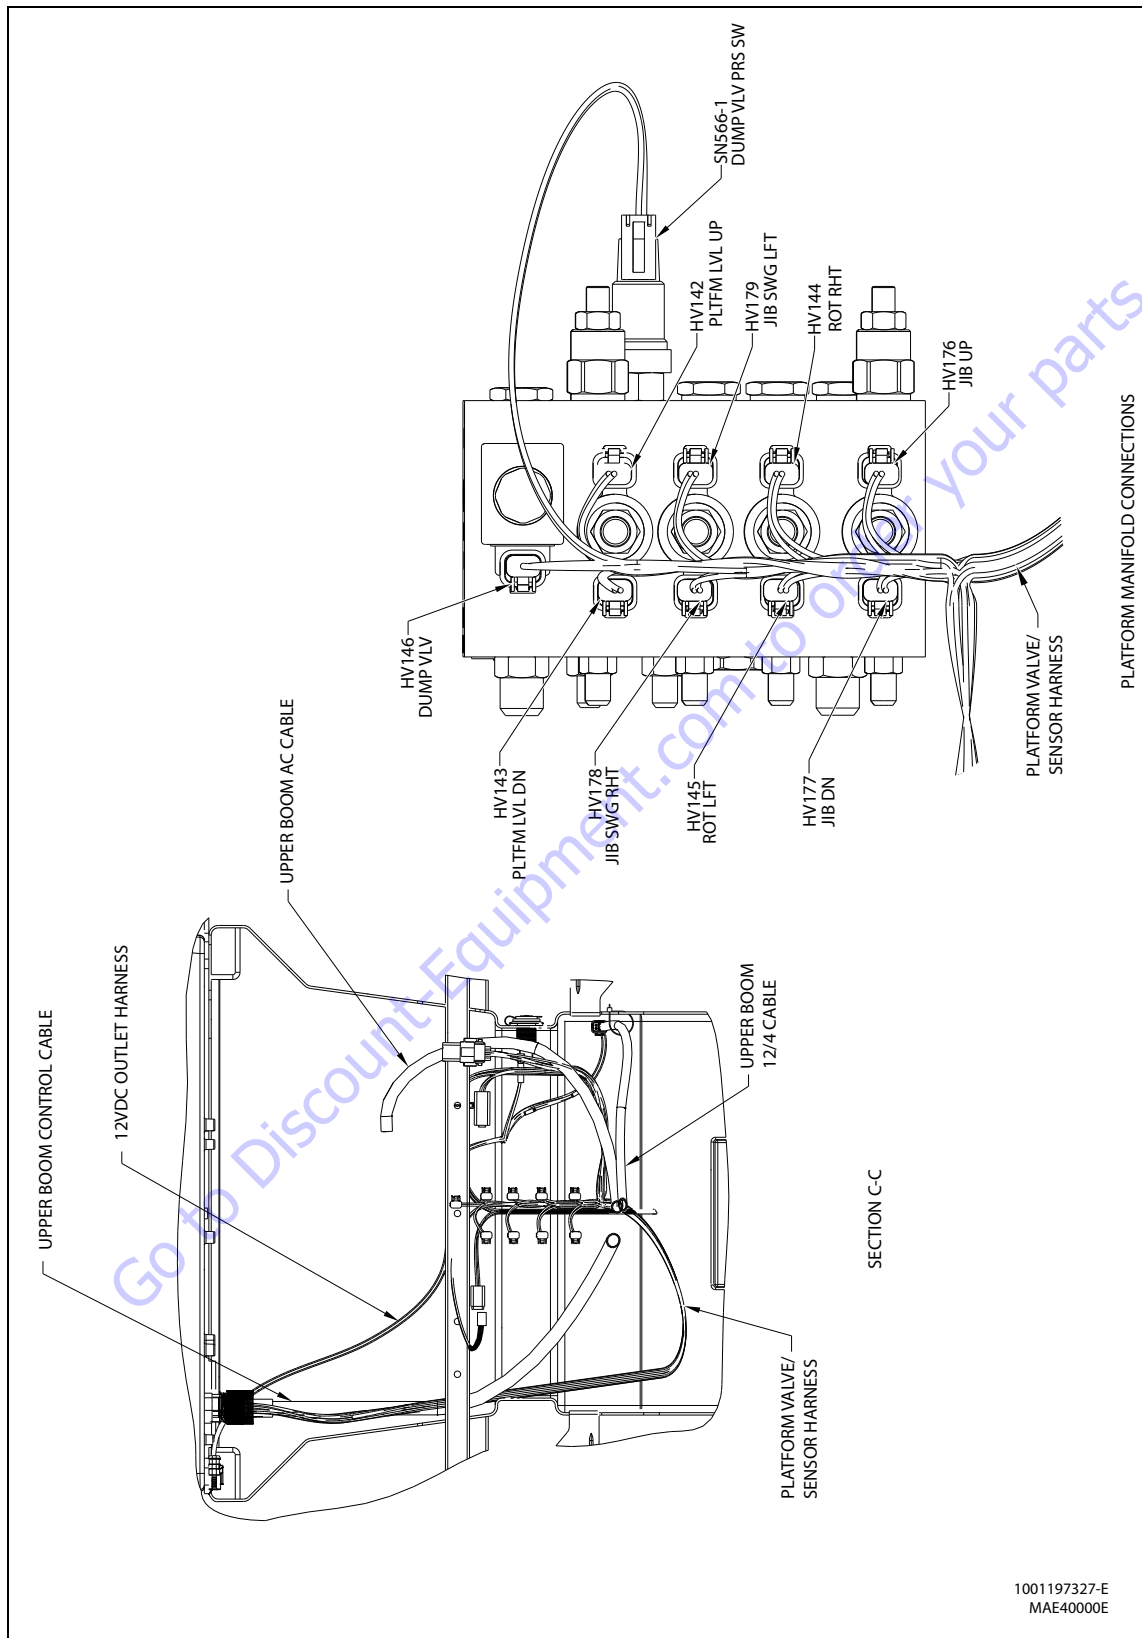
Boom Electrical Installation (CE) - Sheet 4 of 5
